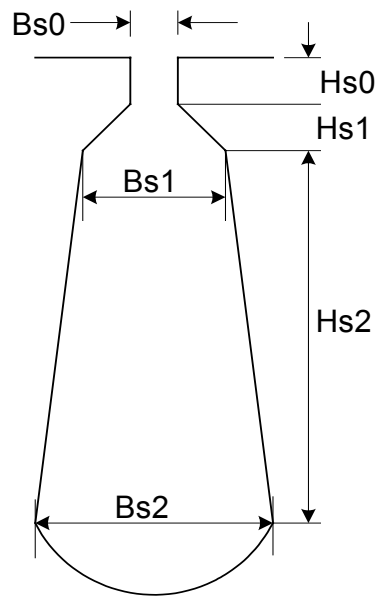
Stator slot dimensions of the buried magnet test motor.
